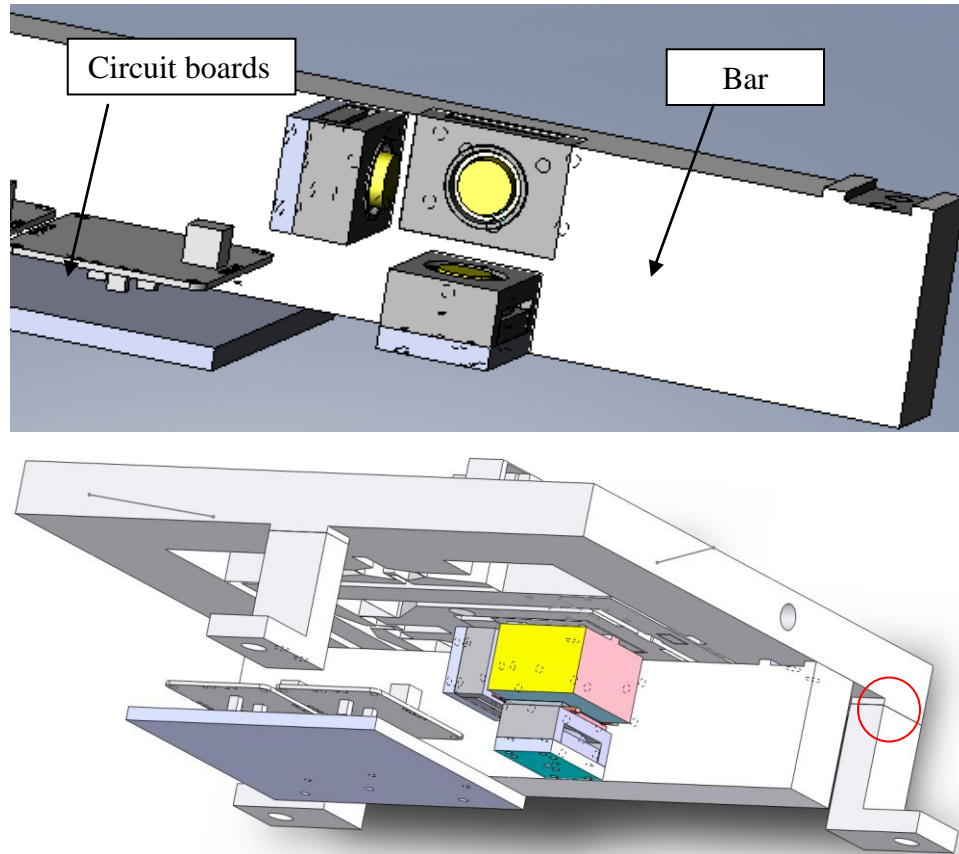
Sensor assembly with the prototype stage. Top: sensors with the bar, Bottom: prototype stage assembly.
